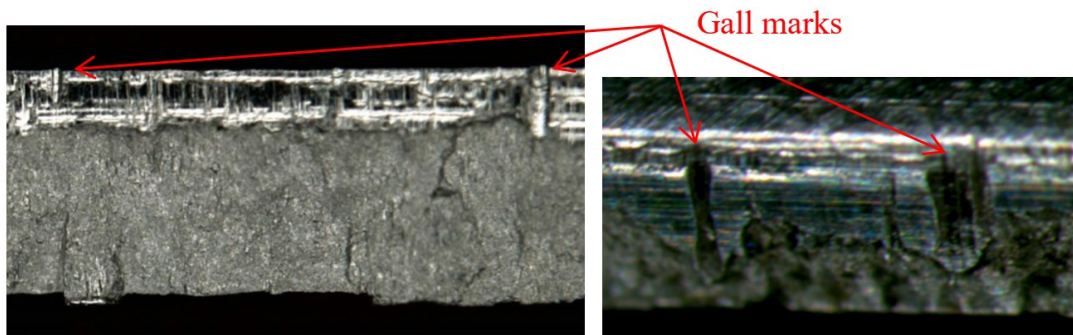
Gall marks occurring in the trimmed edge of production trimmed aluminum panels.
